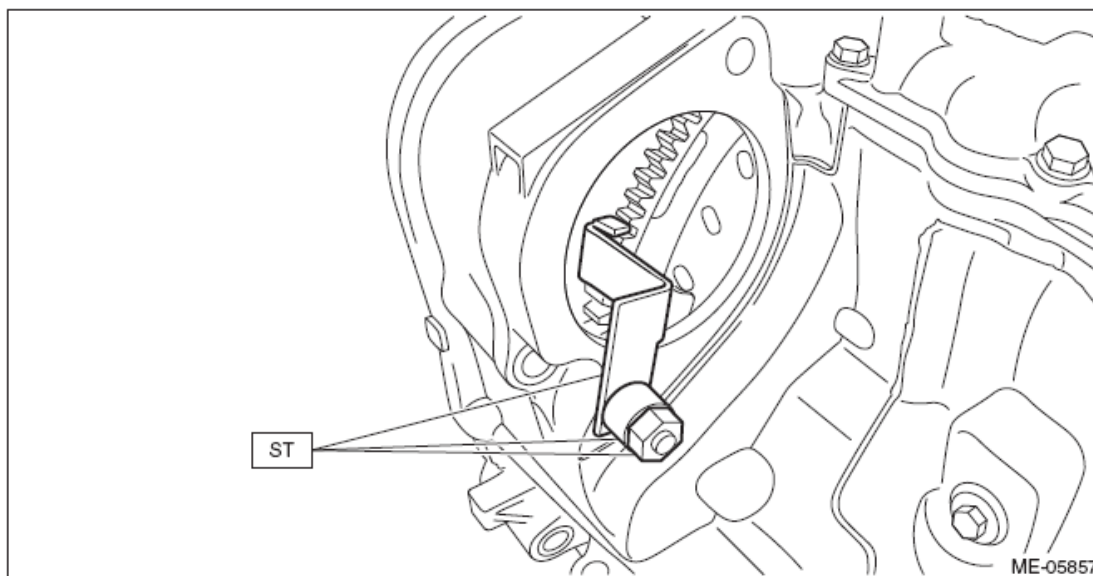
Attaching ST To Torque Converter Clutch Case (CVT Model)
